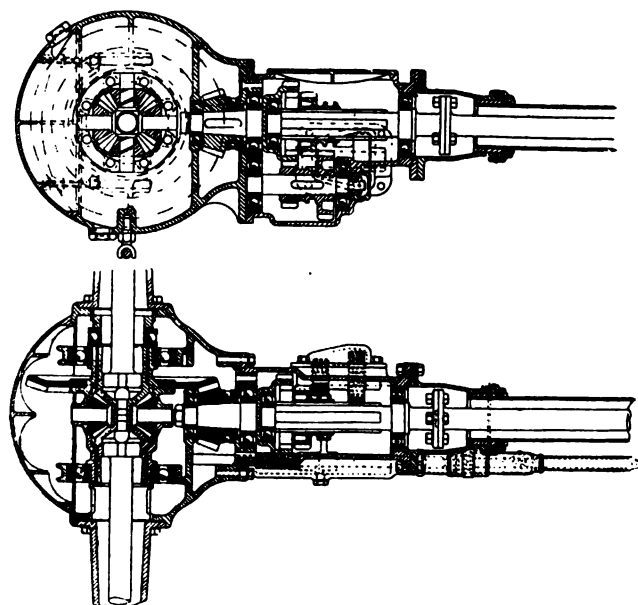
Sectional Elevation and Plan of Two-Speed Gear combined with Back Axle on the new Sheffield-Simplex Six-Cylinder Car.
